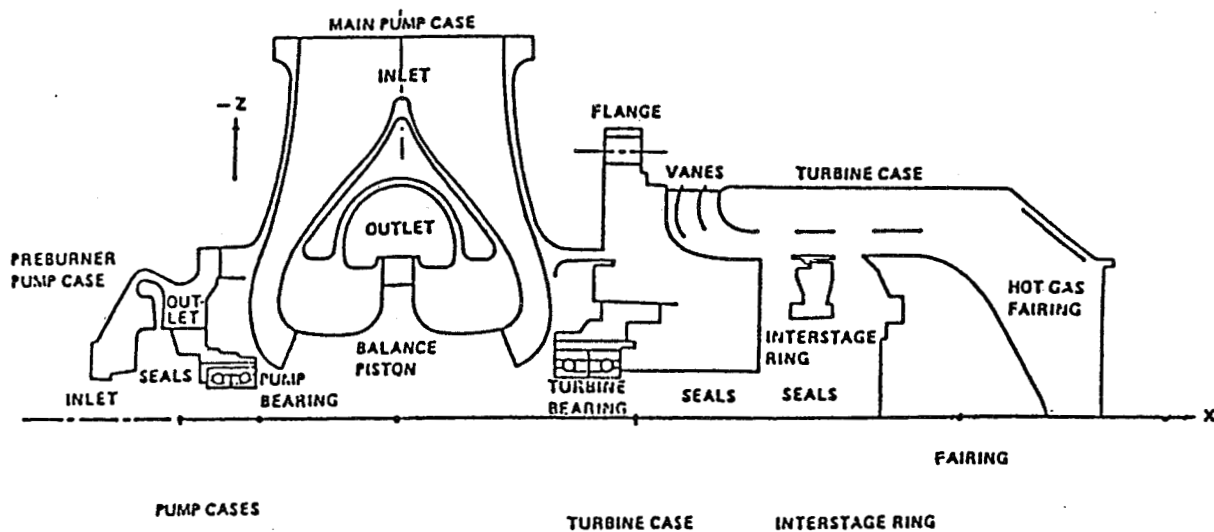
represents the cross-section of the HPOTP rotor. The rotor is supported at the pump-end (left) by two 45 mm ball bearings and at the turbine-end (right) by two 55 mm ball bearings. At the right, is shown the two-stage, hot-gas turbine, which drives the oxygen pump. The main pump is represented by the central impeller and is of a dual flow configuration. The impeller wheels act as a balance piston for this design. In a conventional turbopump, a mechanical axial thrust bearing, absent in both the oxygen and hydrogen pumps, takes up the axial load. Overhung from the pump bearing and attached to the main shaft is the preburner impeller. The preburner impeller is used to provide oxygen for the combustion which powers the turbine stages. The oxygen rotor is designed such that it must be assembled. The main impeller slides onto the turbine section and is held in place with a lock nut. The preburner impeller is assembled after the preburner bearings have been positioned.
